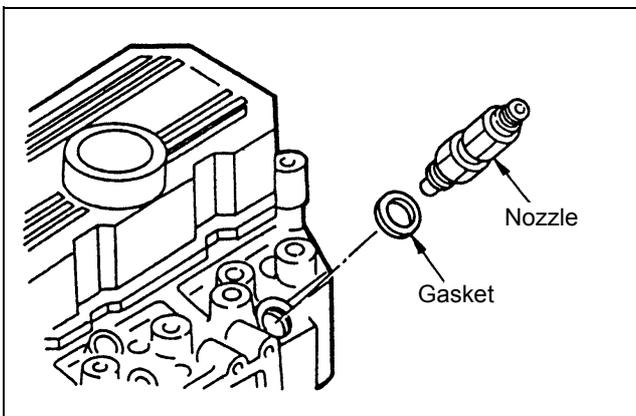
Removing fuel injection nozzles (swirl chamber type)
